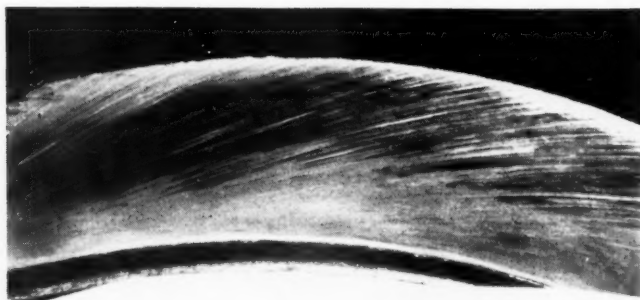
Failed pinion gear tooth surface due to wear — High Torque-Low Speed Axle Test.
